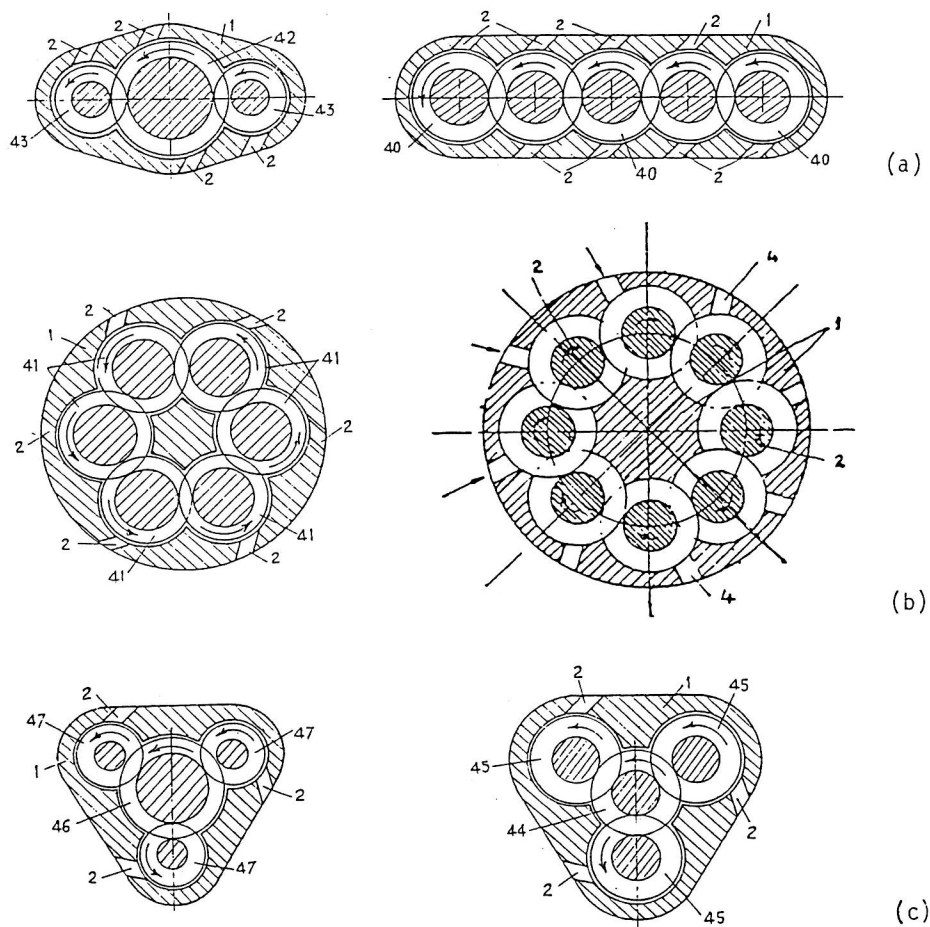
Multiple co-rotating screw extruders after Colombo (1-3) indicating (a) 3 and 5 screw linear arrangements, (b) 6 and 8 screw circumferential arrangements, and (c) 4 screw arrangement with contact spurs.
